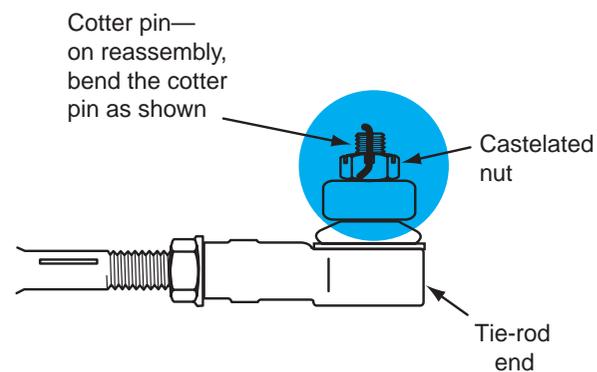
Proper installation of cotter pin in the tie-rod end.
